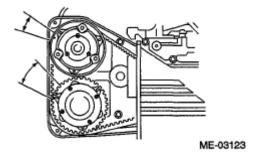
Identifying Clearance Of #1 Cylinder Of Exhaust Valve And #4 Cylinder Of Intake
